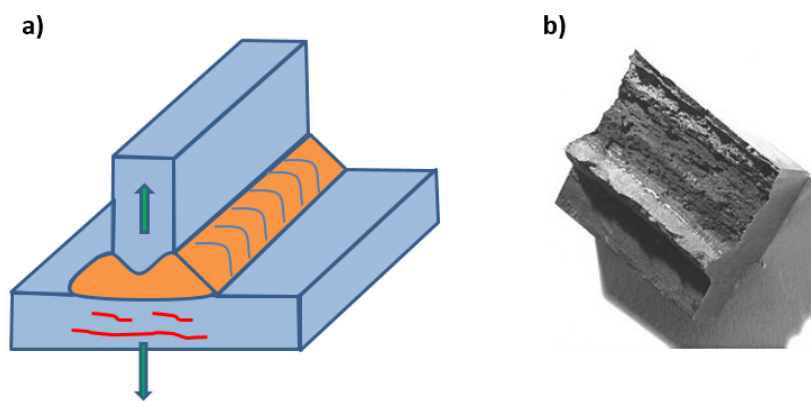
a) Representation of a lamellar tear (red) in a T-joint weld; b) Real image of an appearance of fracture face of lamellar tear [47].
